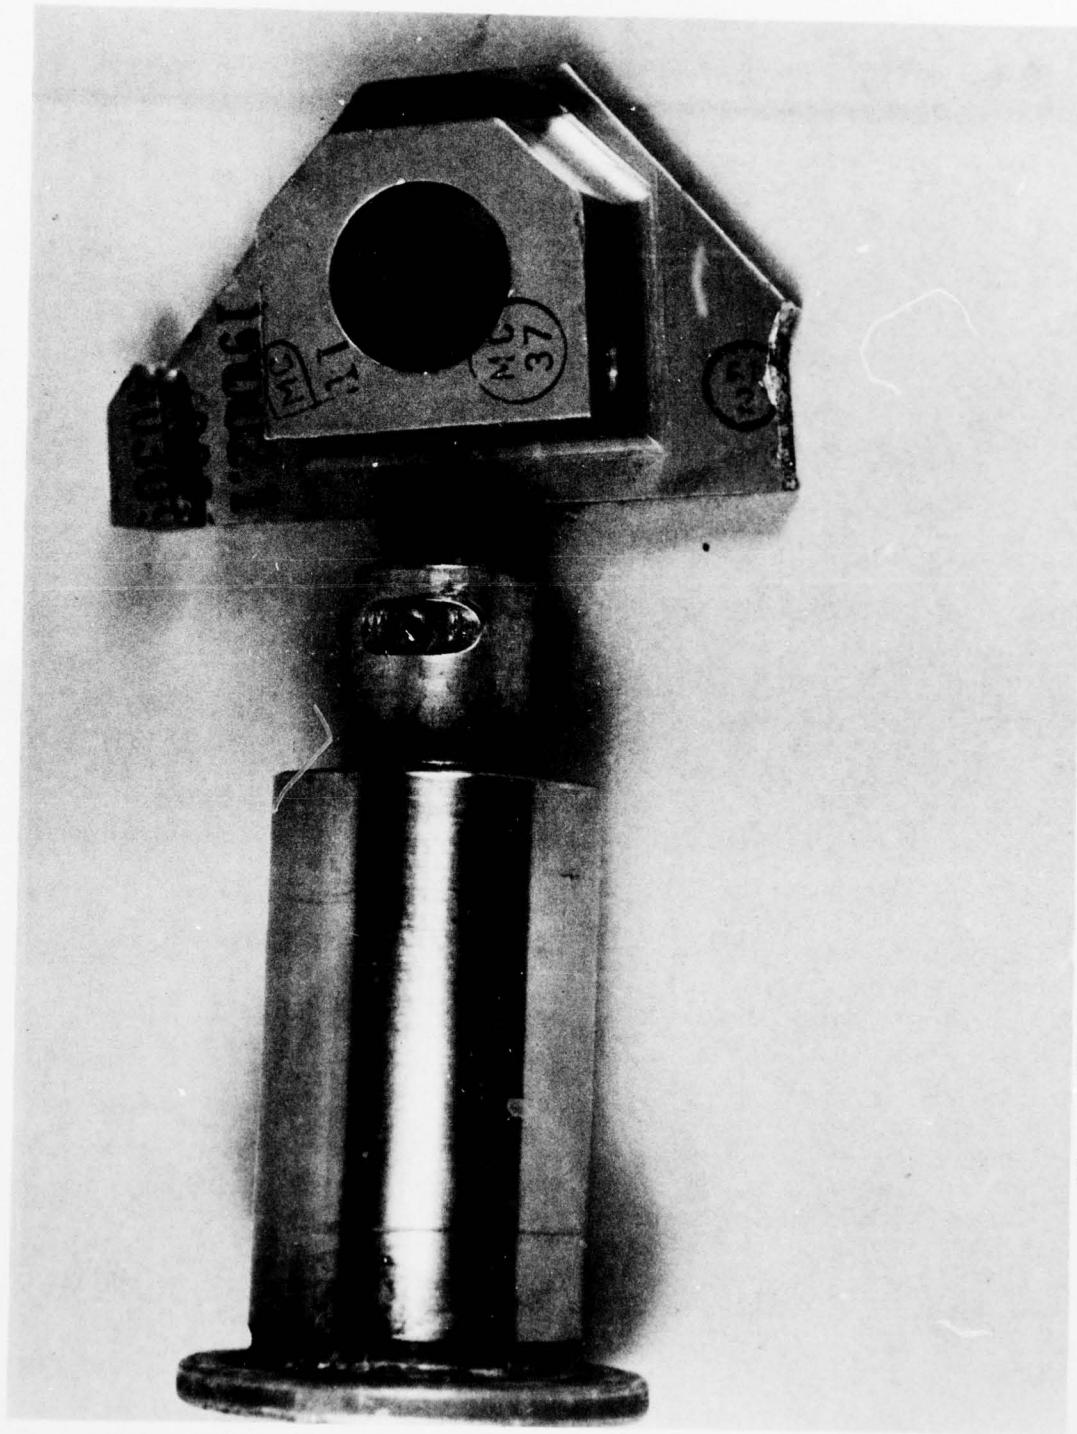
Drag Strut Pin (Part No. 19001) After Failing Load Test
